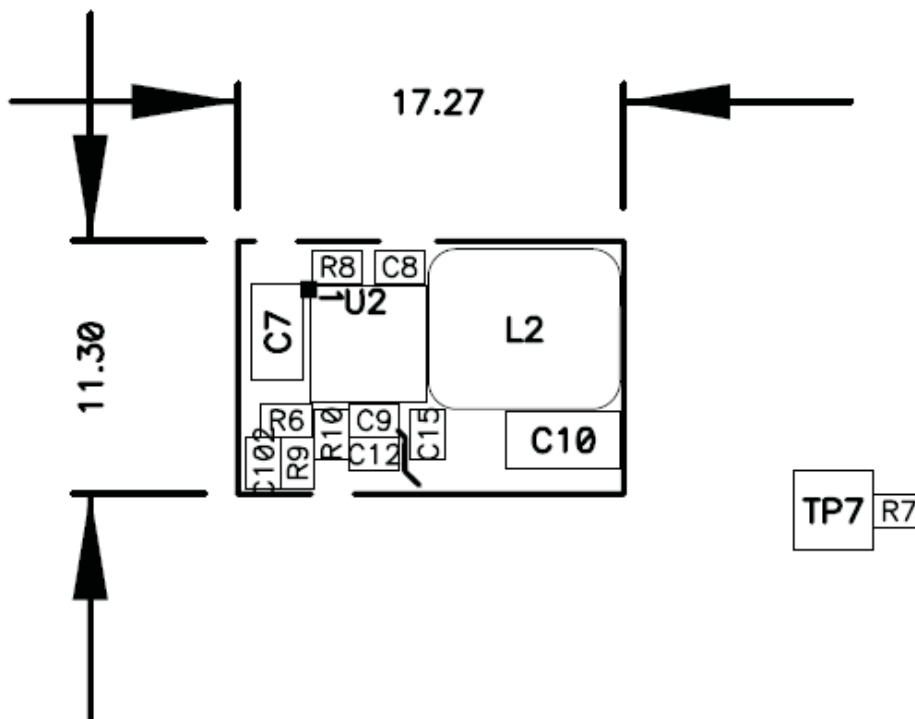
Ultra-Small PCB layout Using TPS54620 (PMP4854-2)
